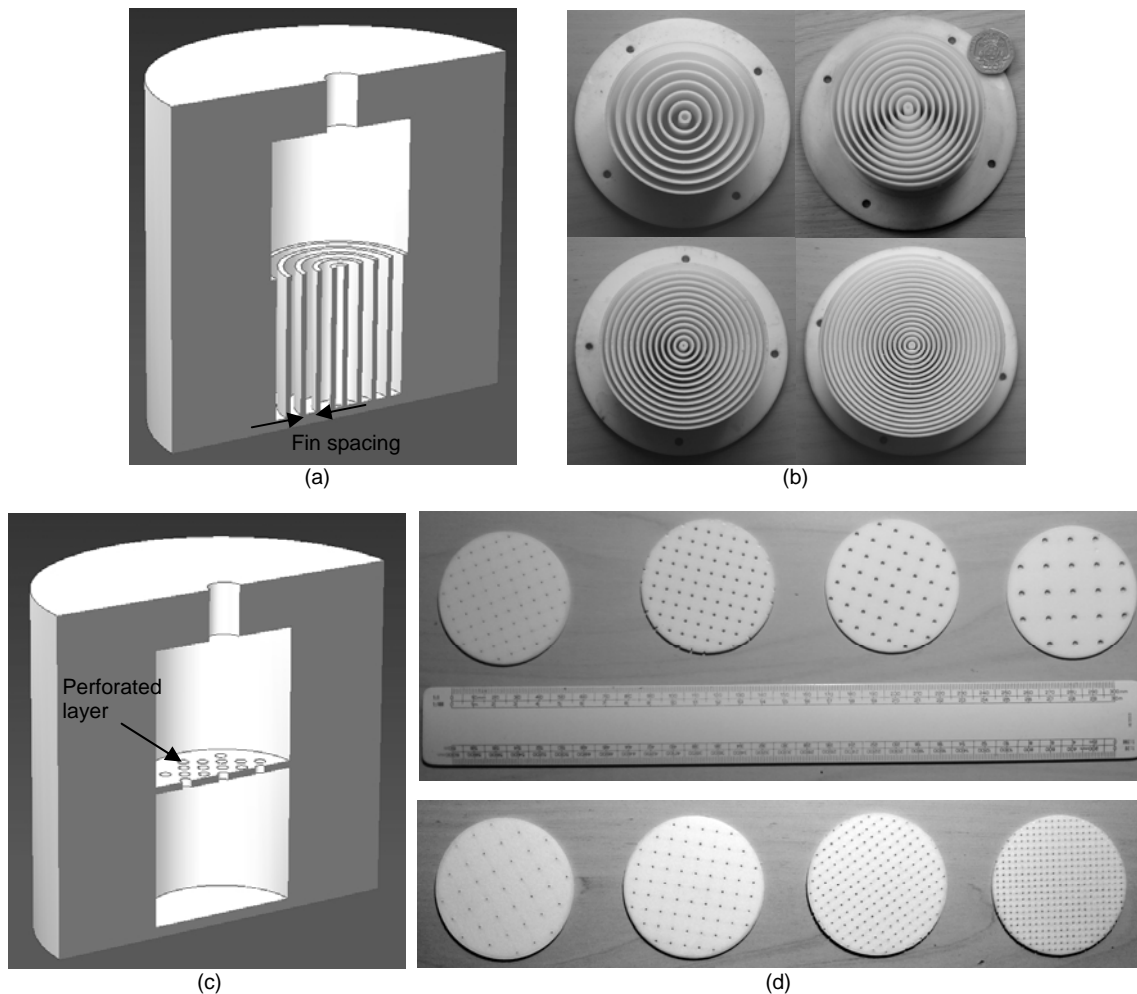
Internal cavity geometries: (a) Internal fins CAD view, (b) fabricated fins, (c) perforated layer CAD view, (d) fabricated perforations.
